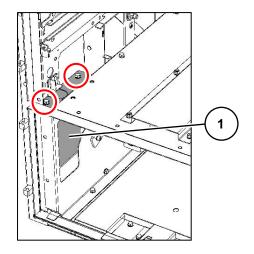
2 bolted joints on metal cover in switching-device compartment
